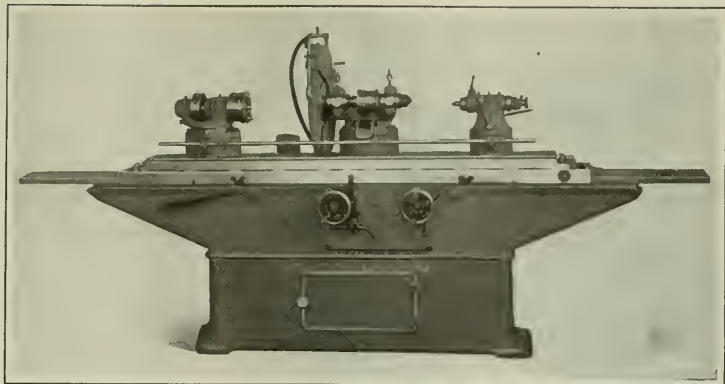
Grinding Machine brought out by the Brown & Sharpe Mfg. Co. for Automotive Parts, in Addition to Regular Straight and Taper Work
